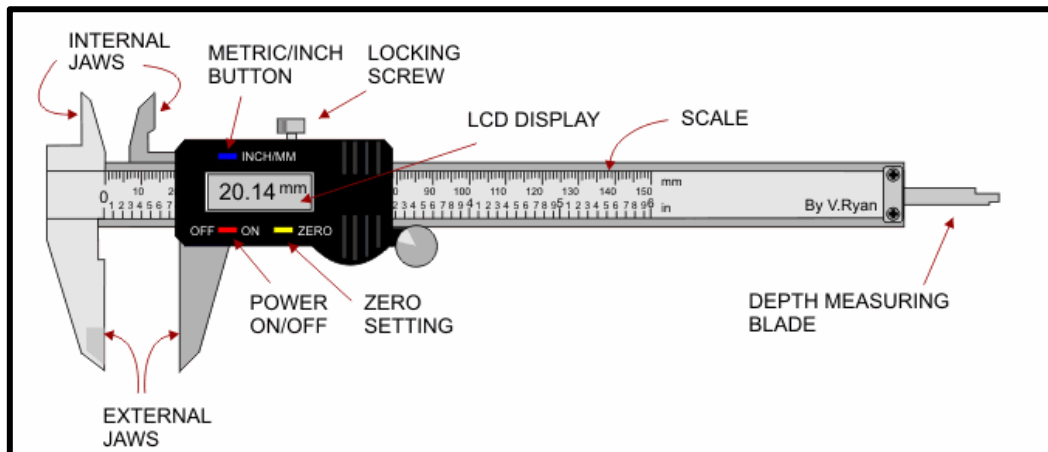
PARTS OF A DIGITAL VERNIER CALIPER
